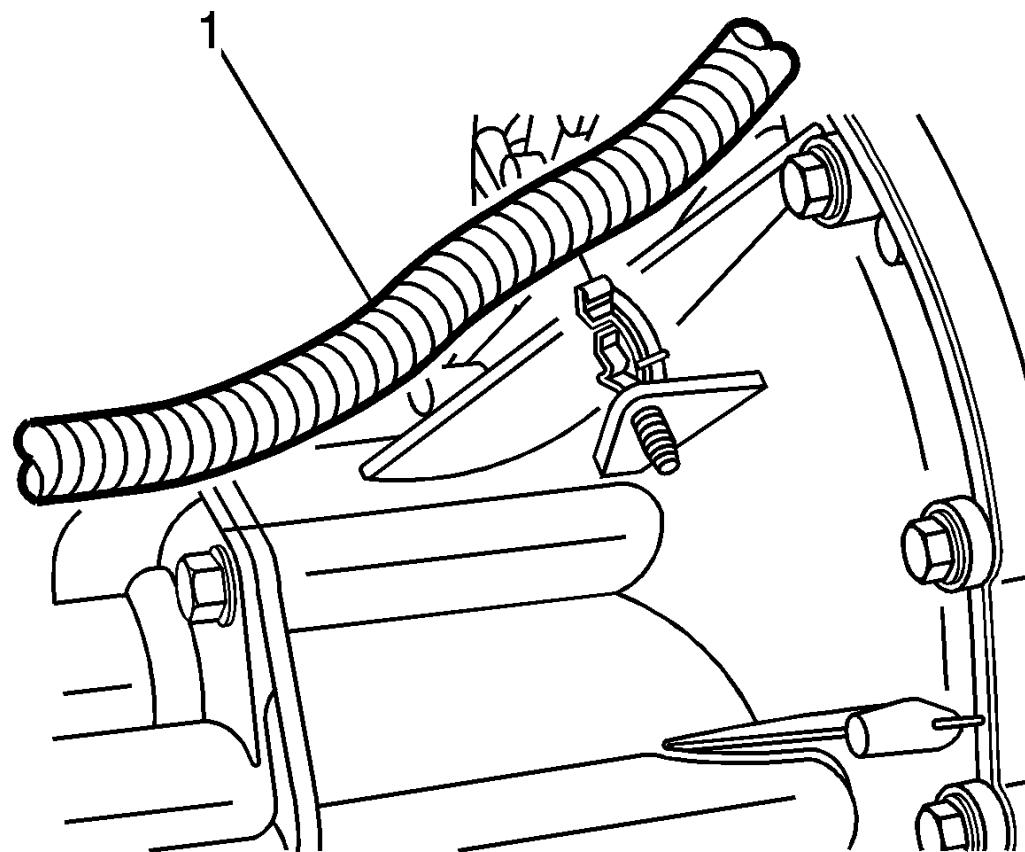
Disconnecting Wire Harness From Differential Carrier Assembly (S4WD Axle Only)
